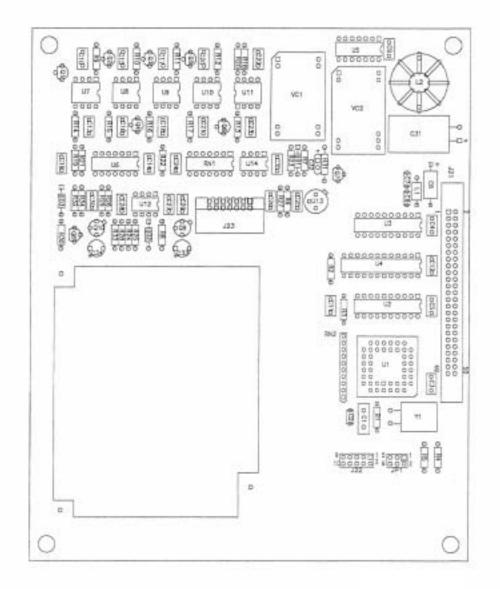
SpO₂ Interface Board Nellcor 0670-00-0557
